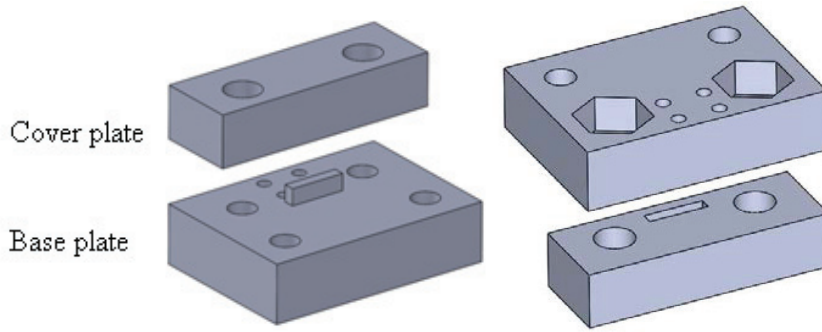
CAD model of the designed grips. Left) top view; Right) bottom view.
